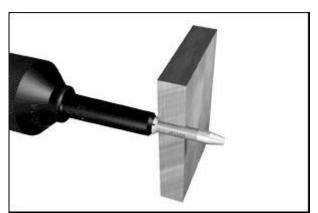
Cold Expansion Process. Mandrel Being Drawn through the Sleeve and the Hole (Fatigue Technology 2011)
